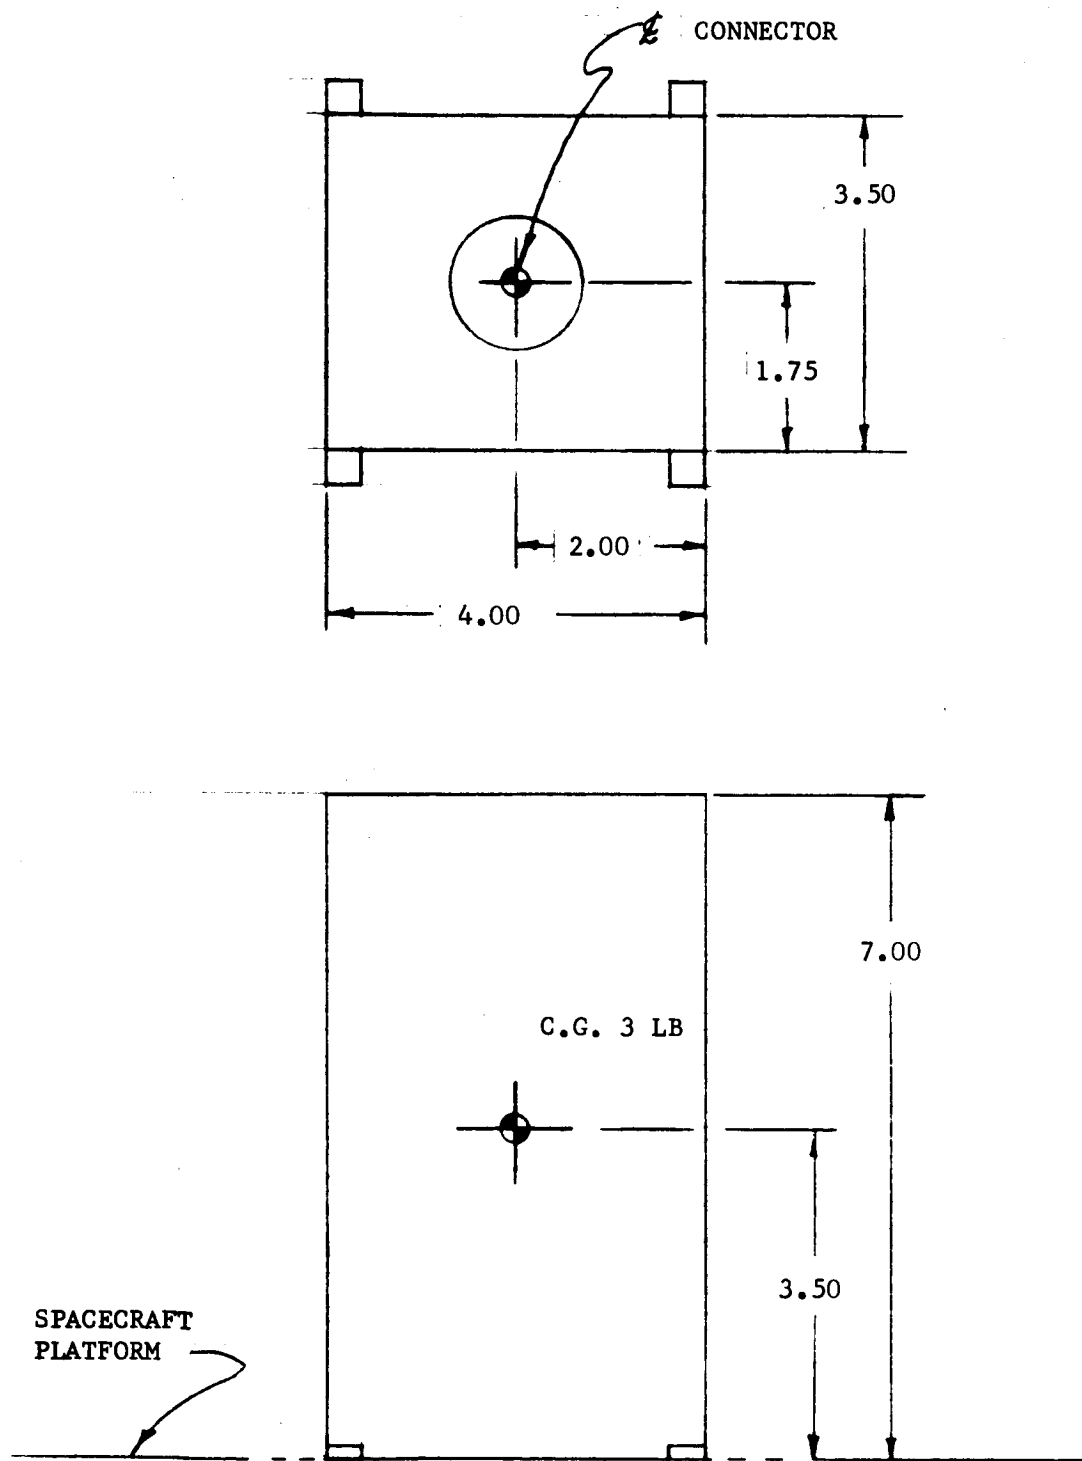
Cockroach experiment central electronics unit (assembly 2)
